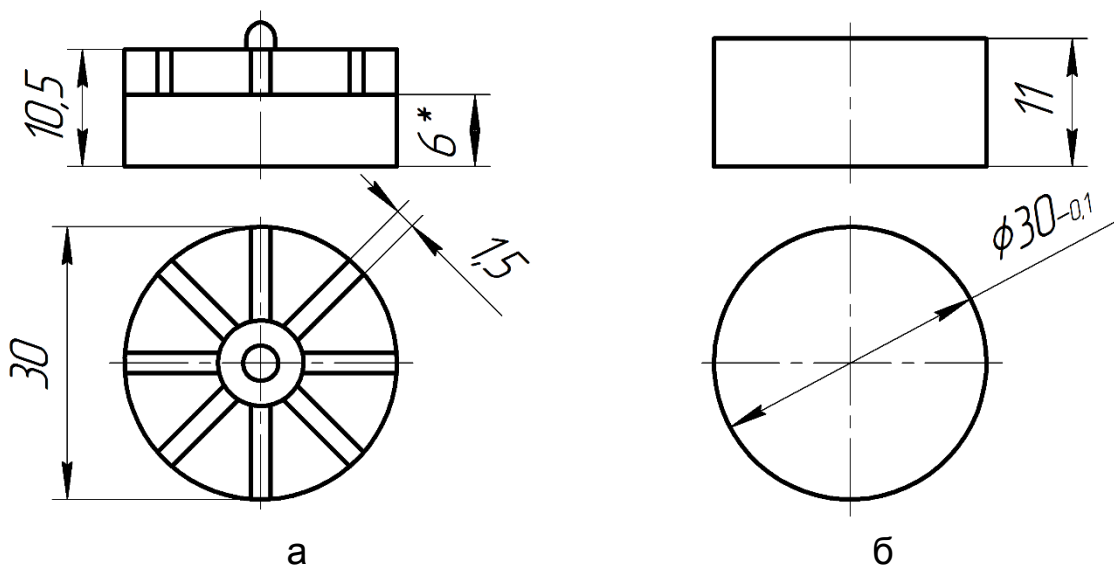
Sketch of experimental forging (a) and workpiece (b)
